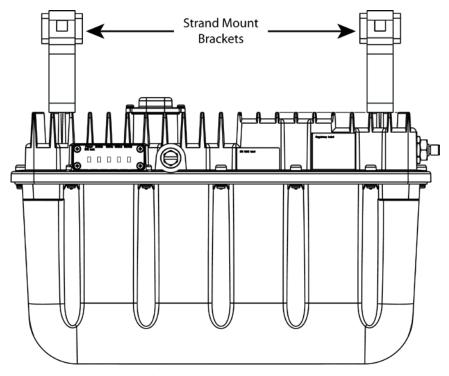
Location of strand mount brackets attached to the OG1600 housing
